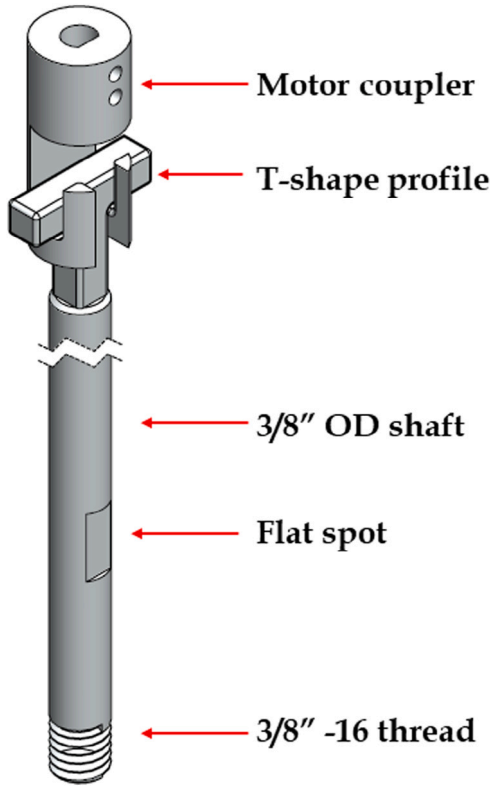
The shaft assembly utilized with a coupler to connect with the motor, T-shaped profile, and 3/8"-16 thread to interface with the basket lid.
